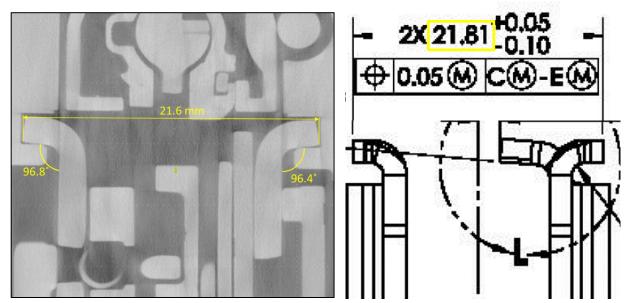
Receiver stamping measurements from CT scan (left), Sig receiver drawing #1301552
